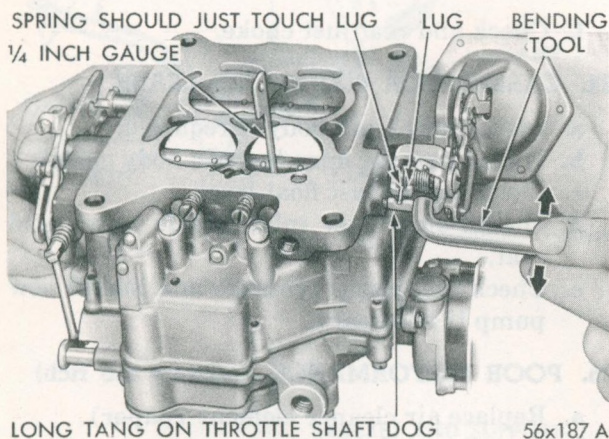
Bending Tang on Throttle Shaft Dog (Step 2-A)
